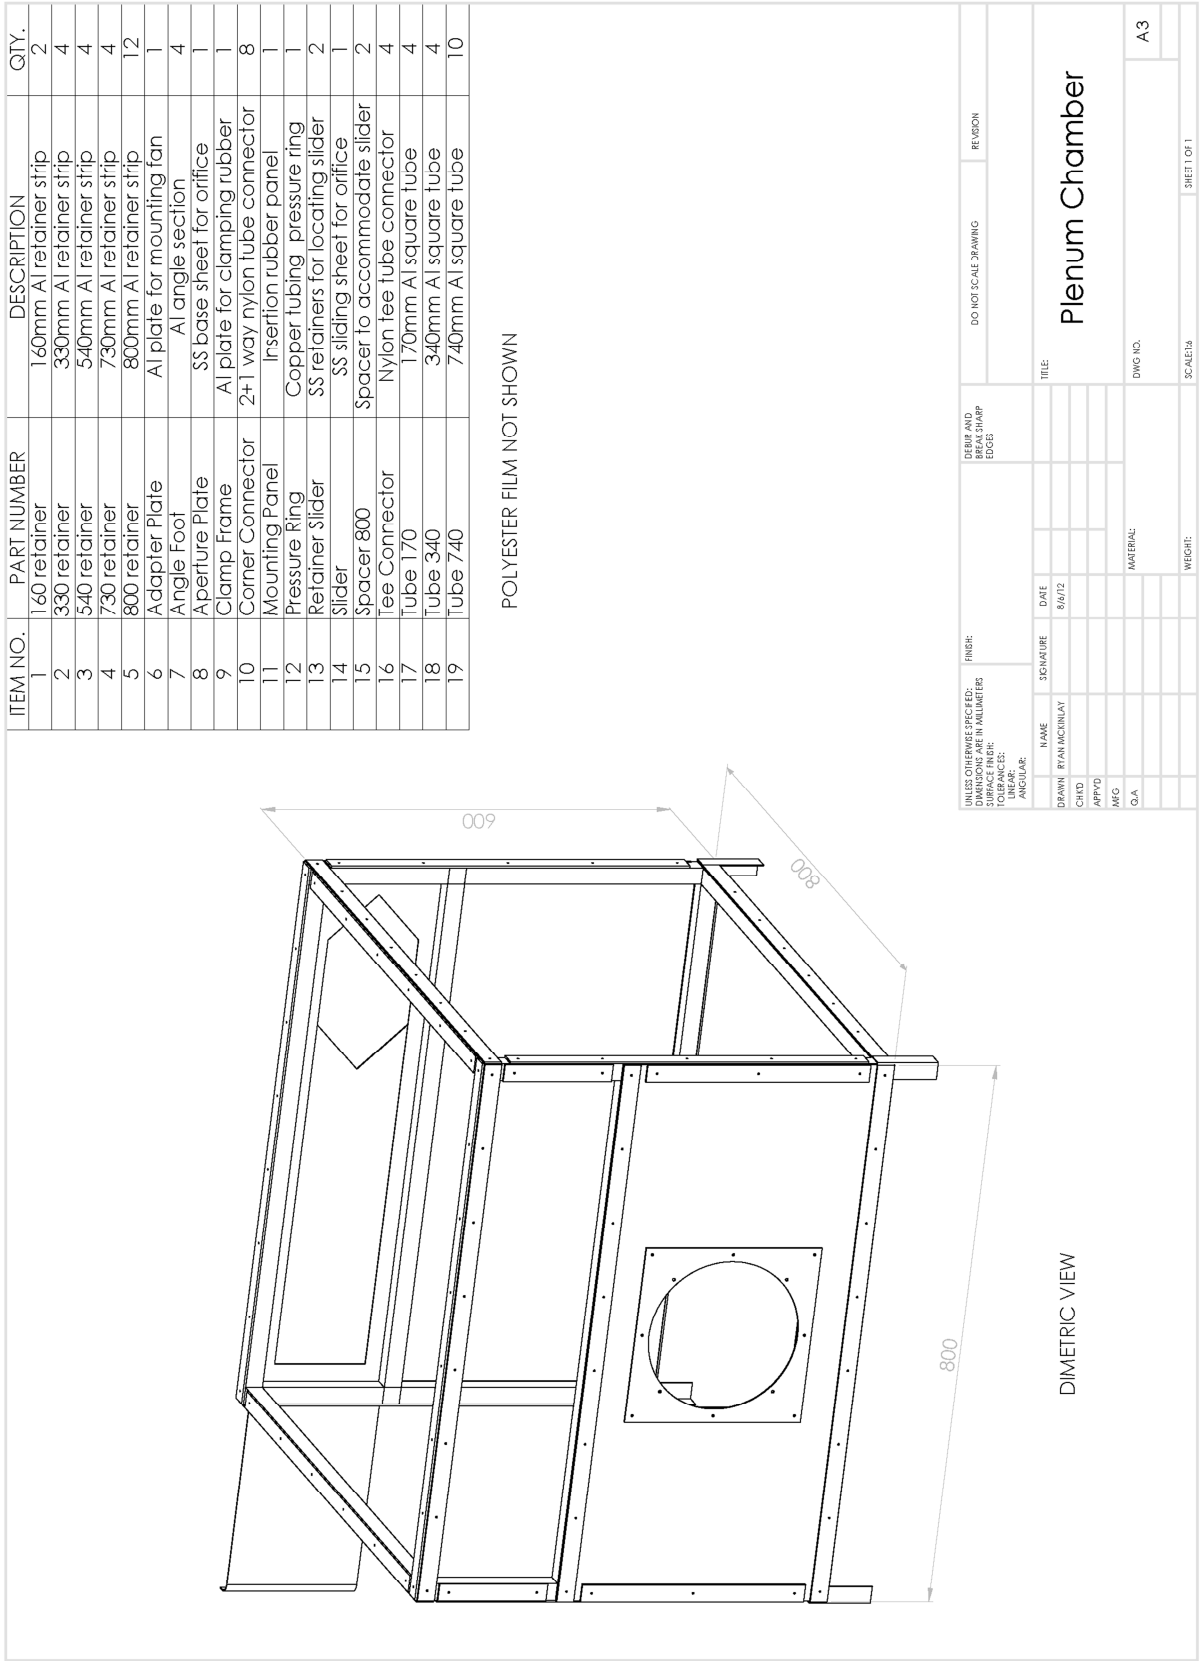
Assembly drawing of plenum chamber showing bill of materials.
